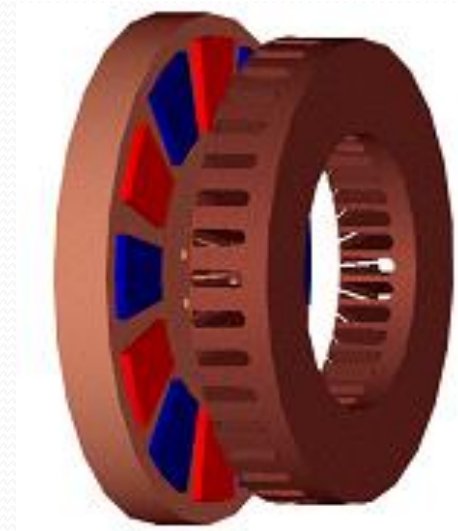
Illustration of torque production mechanism in axial-flux machines.
